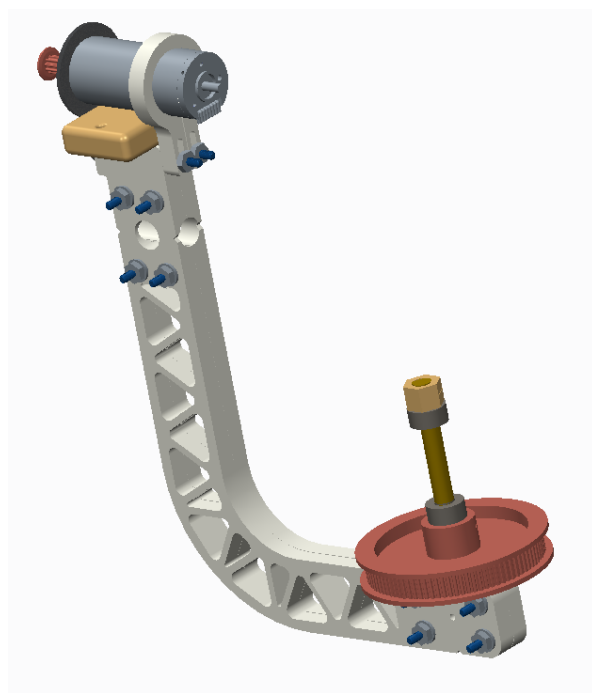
Link 2 with exploded view. Technical drawings for labeled components are provided in Appendix A.
